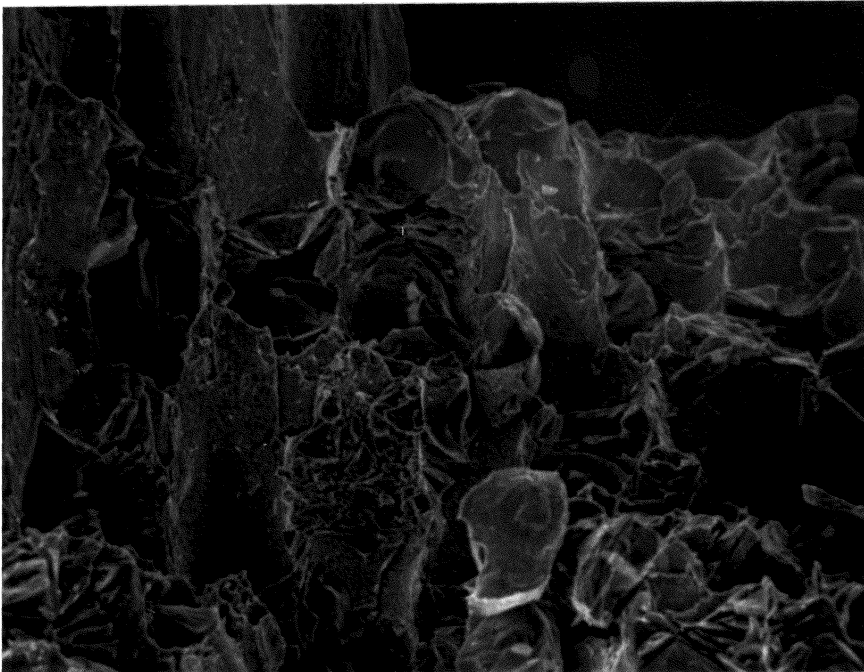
Fracture surface of boron-aluminum composite showing fiber pullout. FN heat treatment. Magnification 90x.
